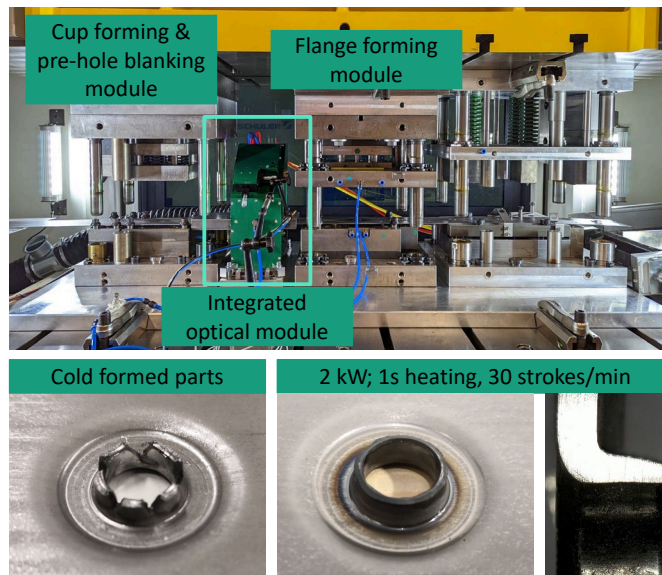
Integration of the optical module into a progressive die (top); Comparison of flange forming results without and with laser preheating (bottom).
